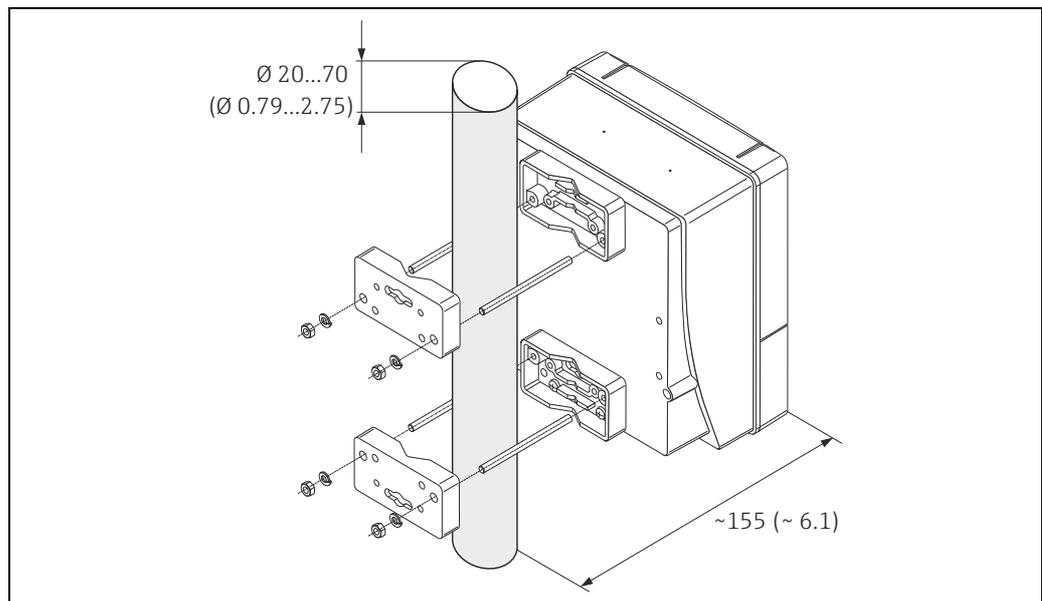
Pipe mounting (wall-mount housing). Engineering unit mm (in)
